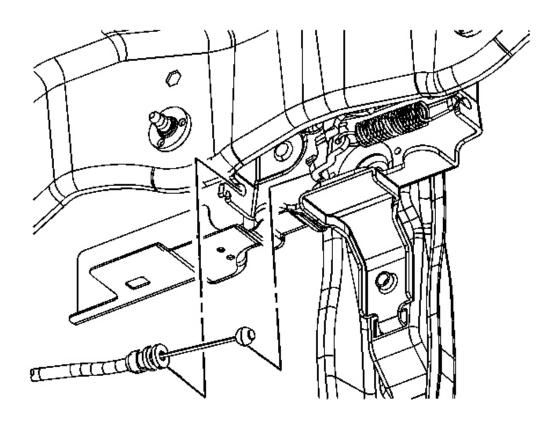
View Of Hood Latch Cable Courtesy of GENERAL MOTORS CORP.
